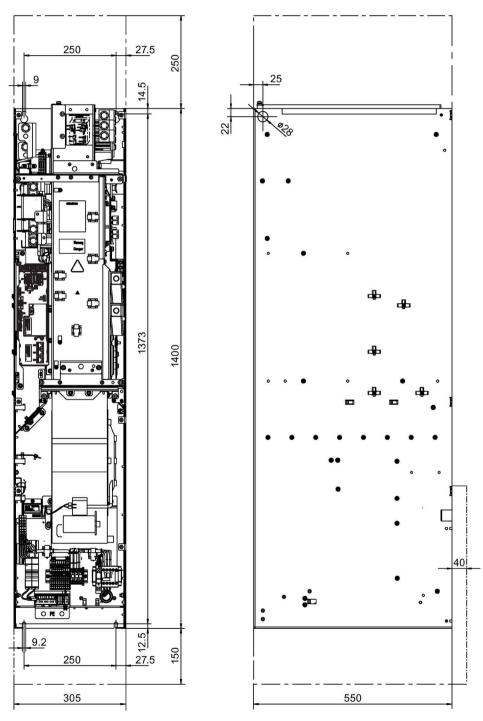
Dimension drawing Smart Line Module, frame size GX Front view, side view
